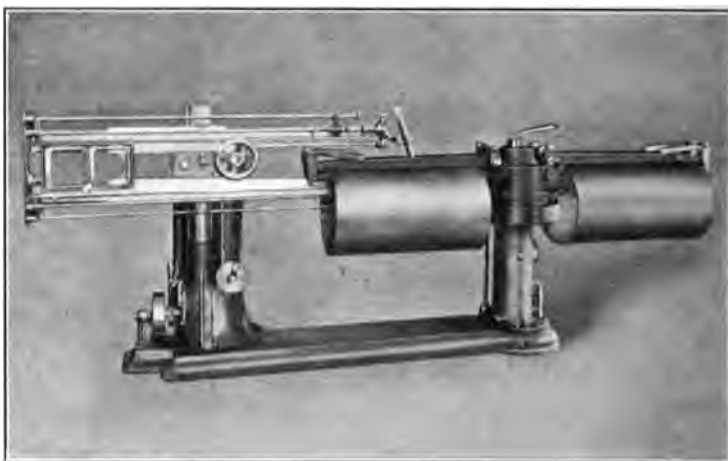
DUOGRAPH WELDING MACHINE.
